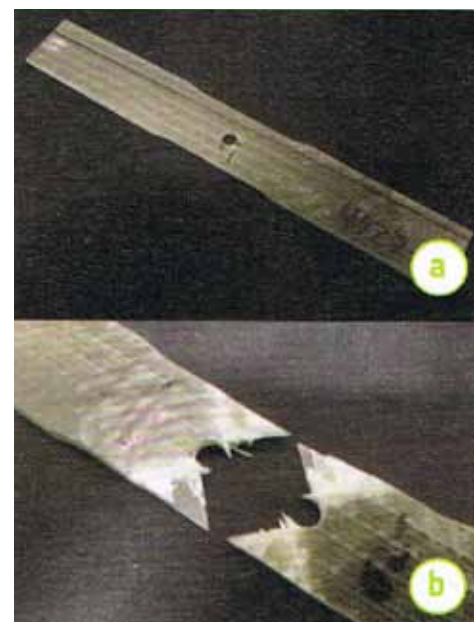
Test specimen prior to testing (a), Test specimen after fatigue (b)
